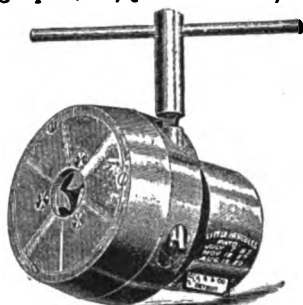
LITTLE HERCULES DRILL CHUCK.
